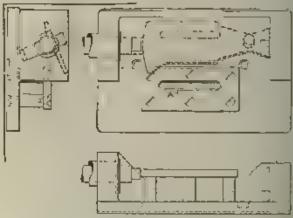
PROFILING FIXTURE FOR EJECTOR-CLEARANCE CUT
